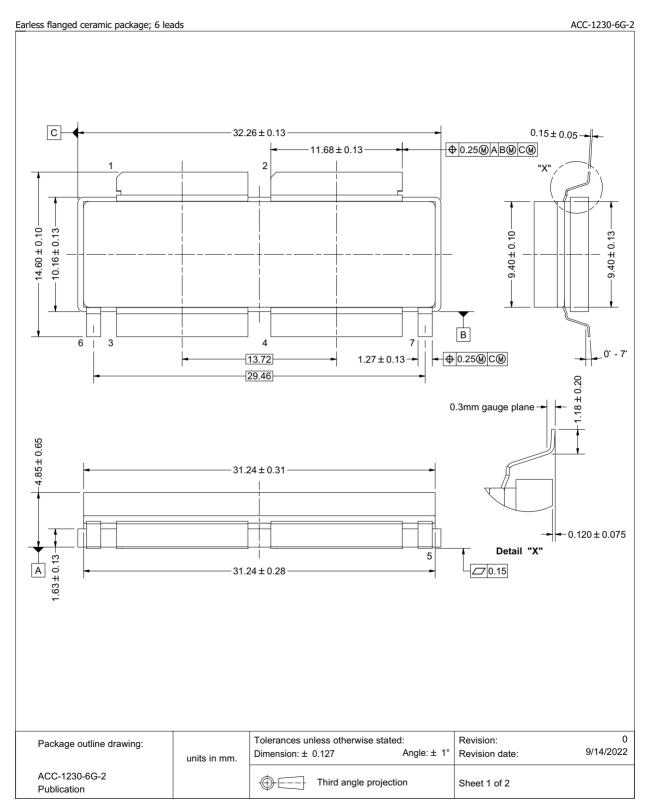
Package outline ACC-1230-6G-2 (sheet 1 of 2)
